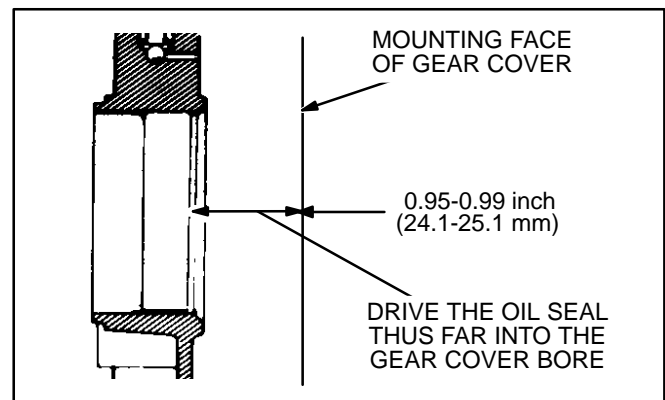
FRONT (GEARCASE) CRANKSHAFT OIL SEAL
